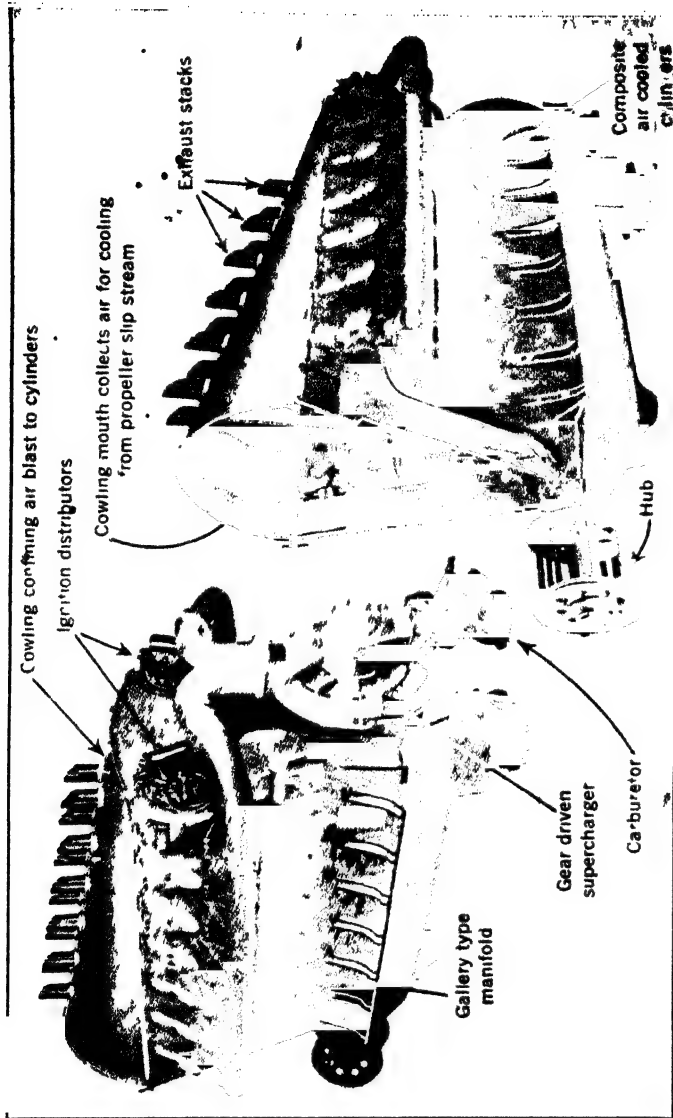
A.—Views of Liberty Air-Cooled Aviation Engine in Which Flanged Cylinders Replace the Water Jacketed Cylinders Originally Used.
